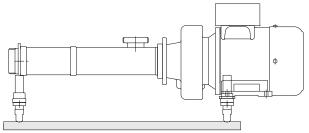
Horizontal dry pump unit setup on tilting base, SE design
